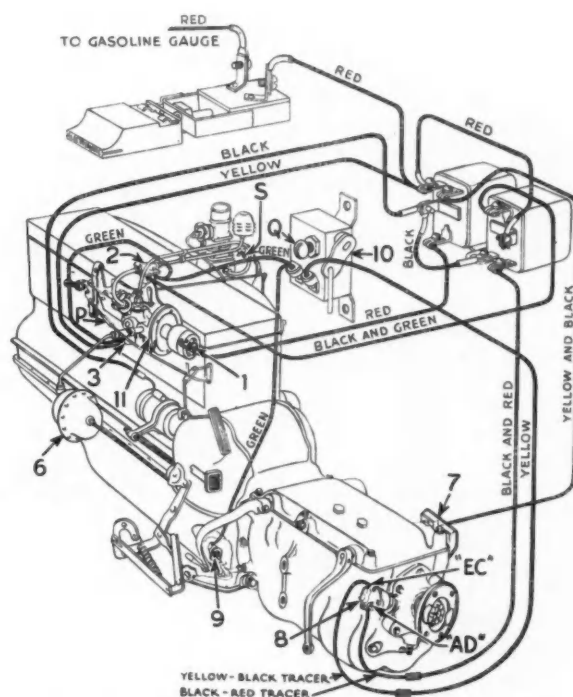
Schematic drawing showing the diaphragm chamber on the side of engine crankcase.
